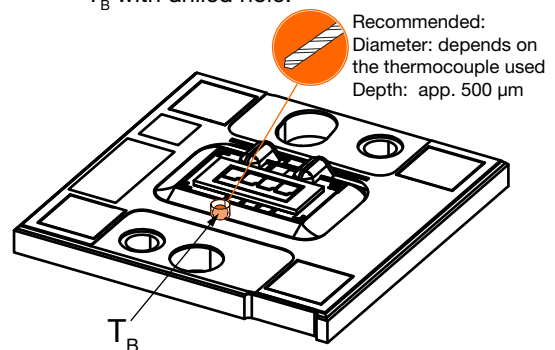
Ideal mounting position of a thermocouple for the OSRAM OSTAR Headlamp Pro
